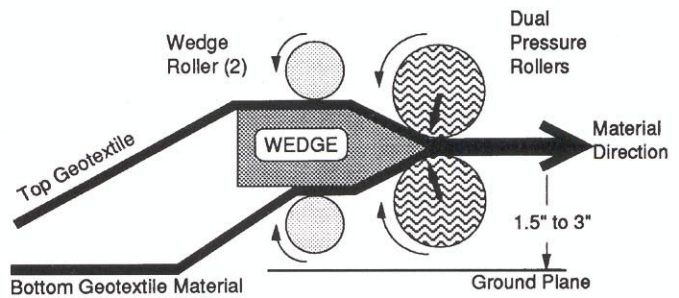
Opposing Pressure Roller Wedge Welding (OPR), Neidhart Patented Technology.
